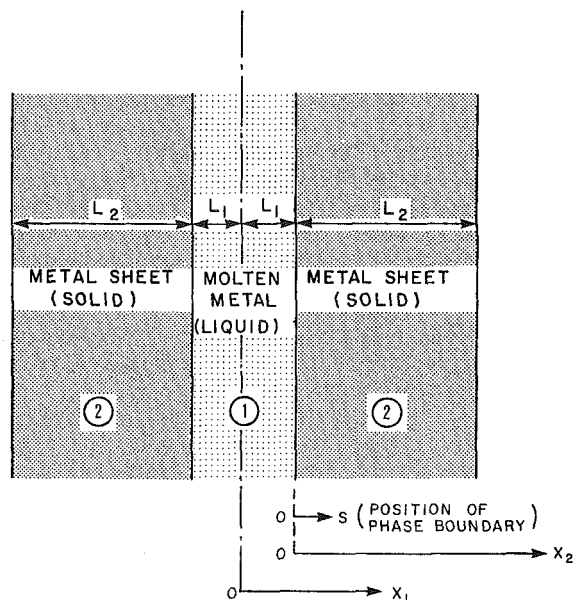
Schematic diagram of the fusion welding problem
